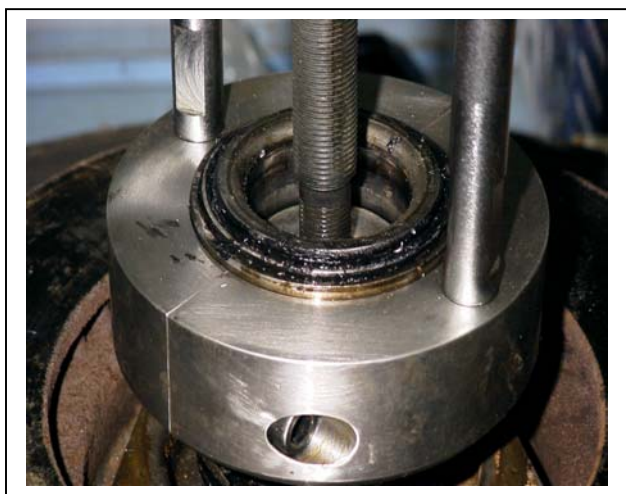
Warner bearing tool puller clamp halves assembled around the bearing pack. Also shown are the OTC puller tool rods threaded into the bearing puller clamp and the puller screw resting on the "puck".
